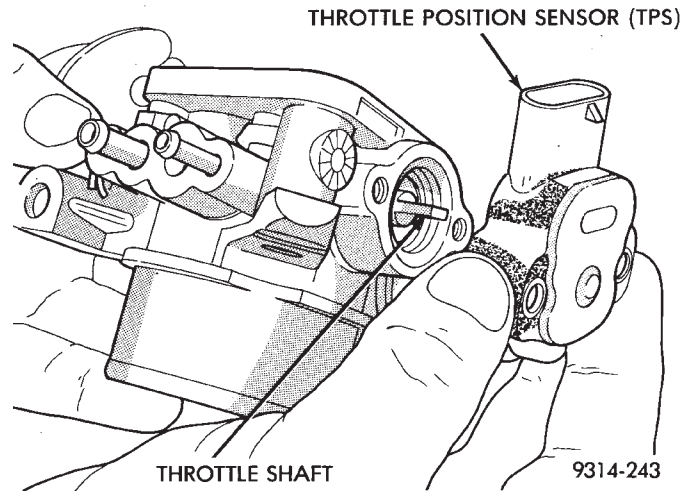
Servicing Throttle Position Sensor—3.3/3.8L
